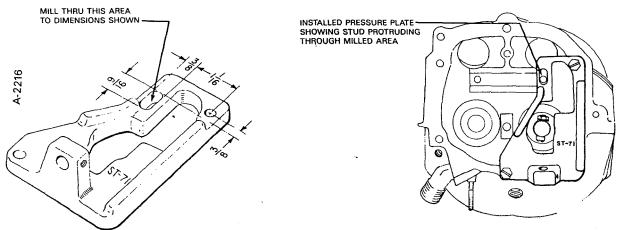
Details for Modifying ST-71 Compressor Plate For Use on "76 Series" Engines
